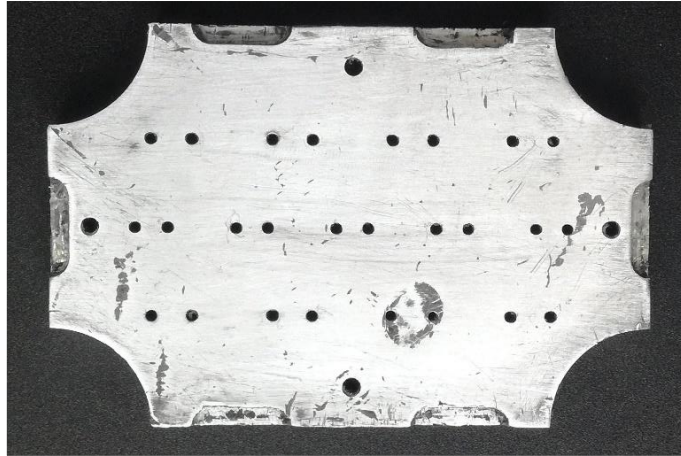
Parts of the Aluminium Mould: Top mould layer.
